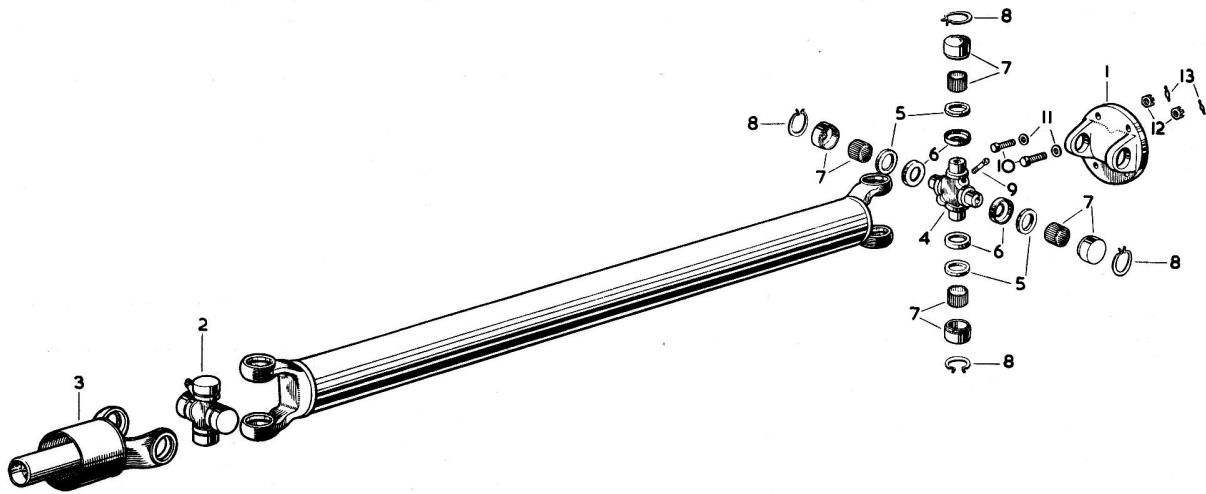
EXPLODED VIEW OF PROPELLER SHAFT (STANDARD TRANSMISSION)
